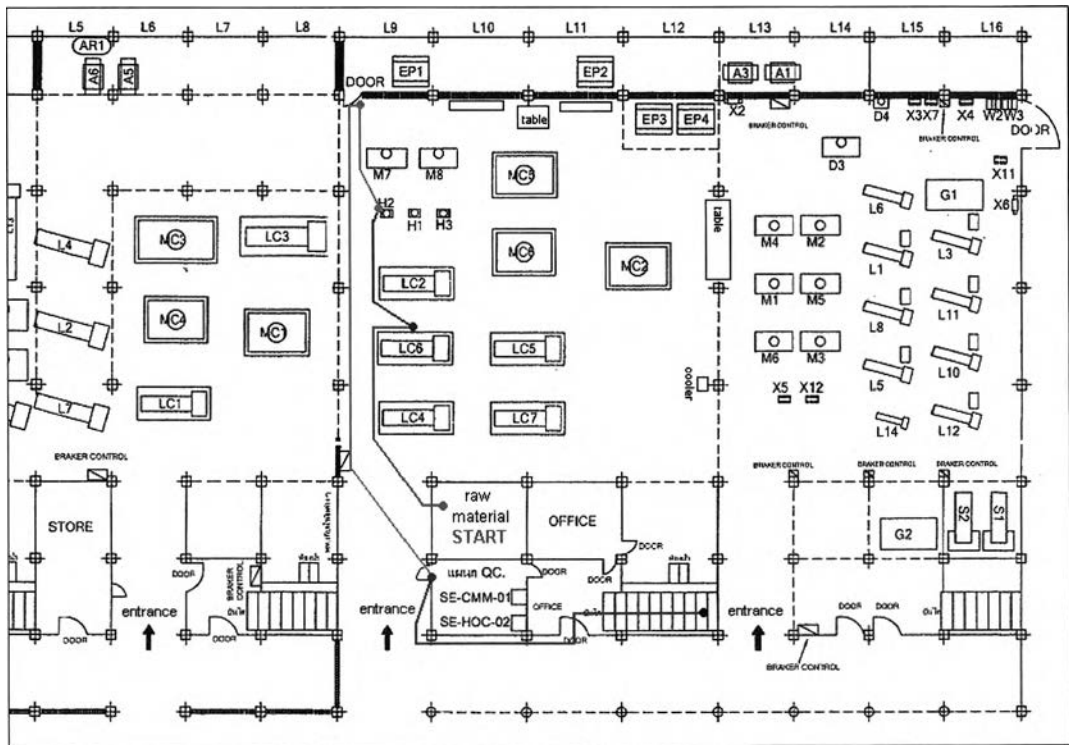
B – Set screw string diagram (part 2of 2 for pedicle screw and part 3 of 3 for poly screw) for design #2
